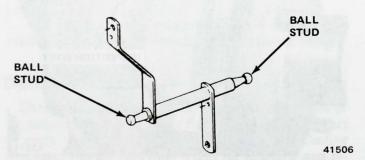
Six-Cylinder Clutch Belicrank Pivot Ball Studs
